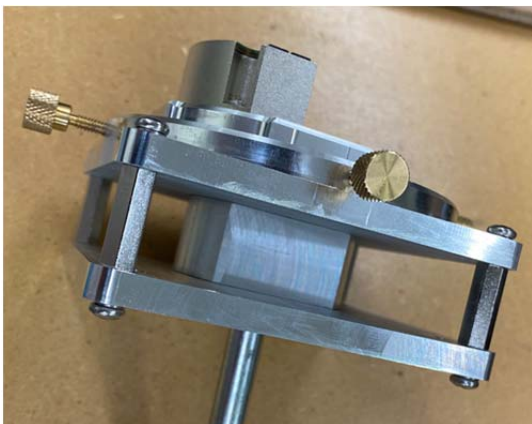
Encoder, sled, adjustment housing and dual bearings assembled together
